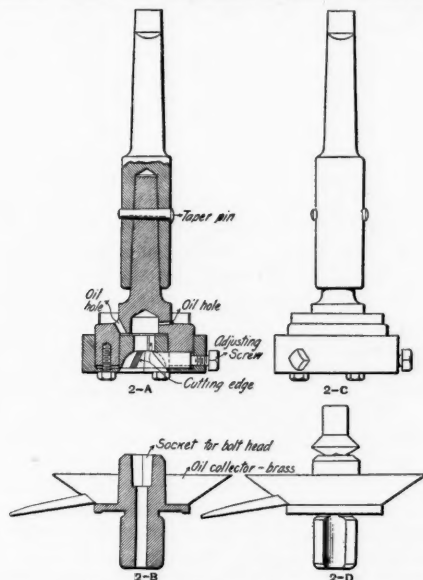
Device for Turning Patch Bolts—Jackson Shops
